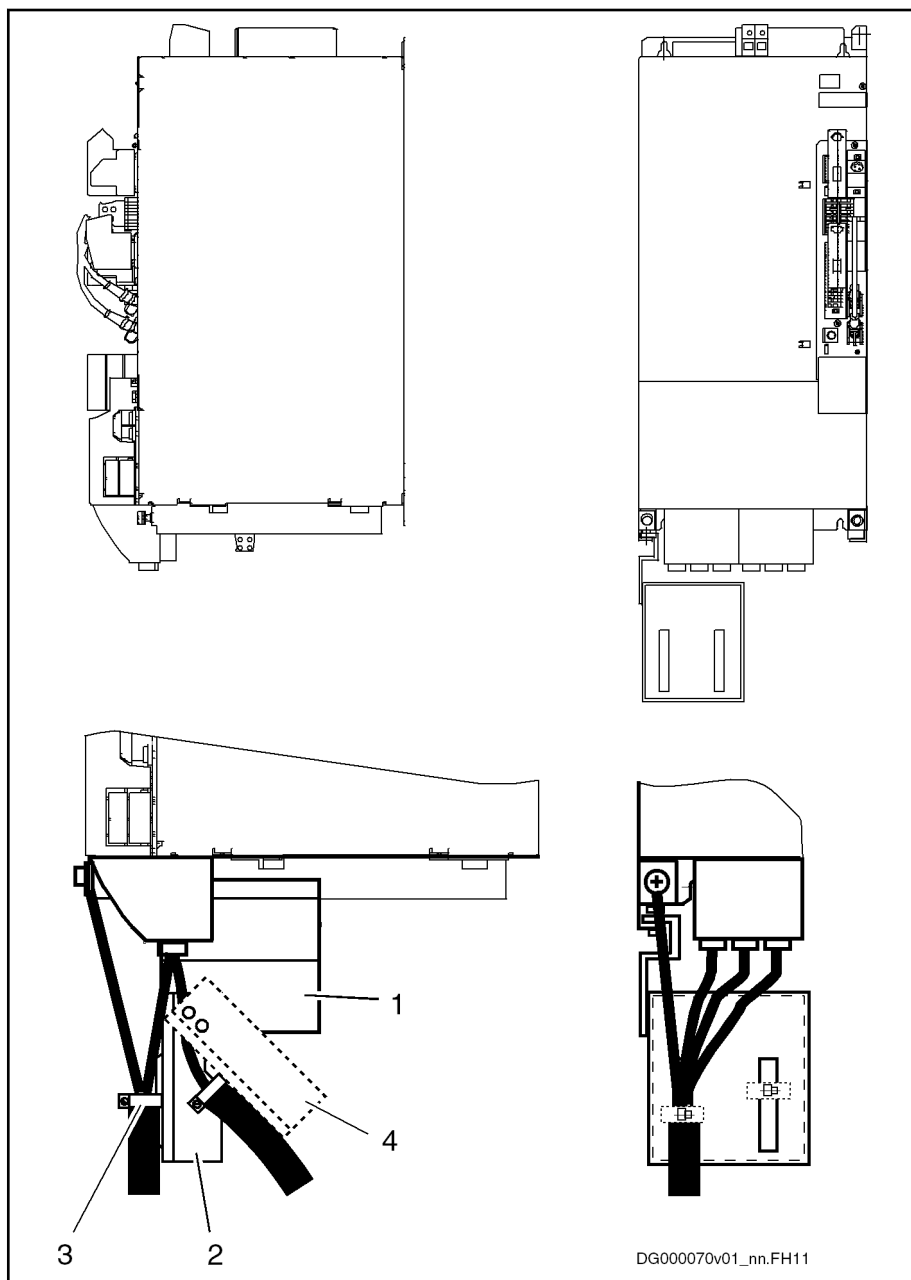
HAS02.1-004 at Bottom of Drive Controller HCS03.1E-W0070
